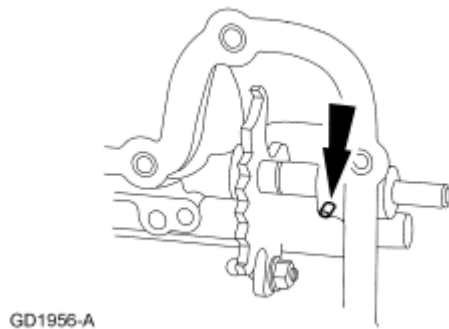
Manual Valve Detent Lever Shaft Retaining Pin
